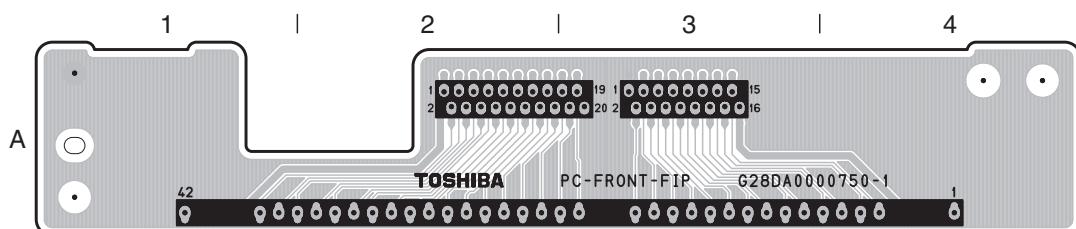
Front FIP PC Board (Bottom side)
